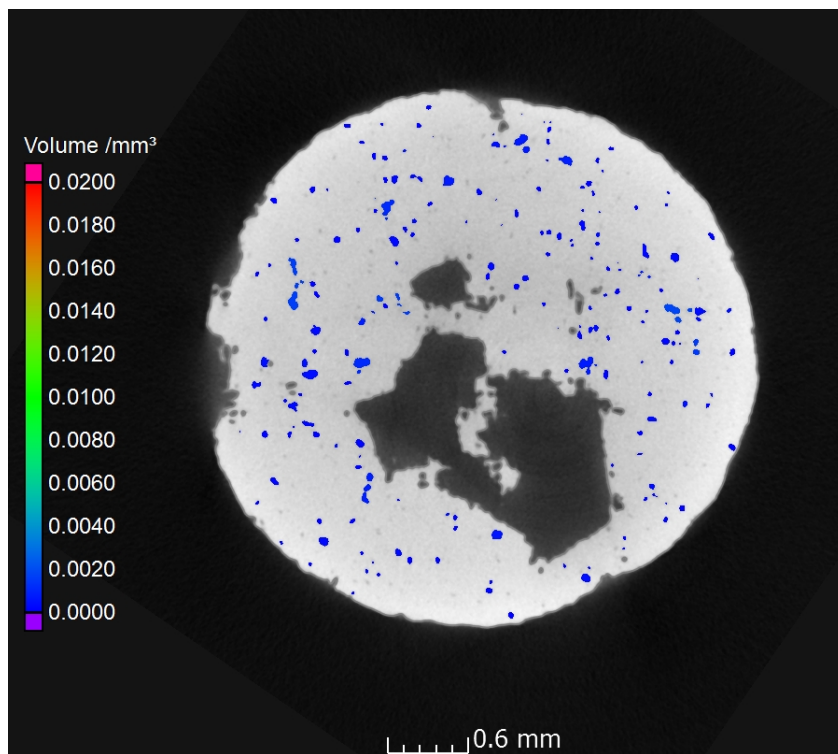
Virtual cut of the bottom part of the fractured tensile specimen. Segmented voids are closed voids. Non-segmented voids are open to the rupture surface.
